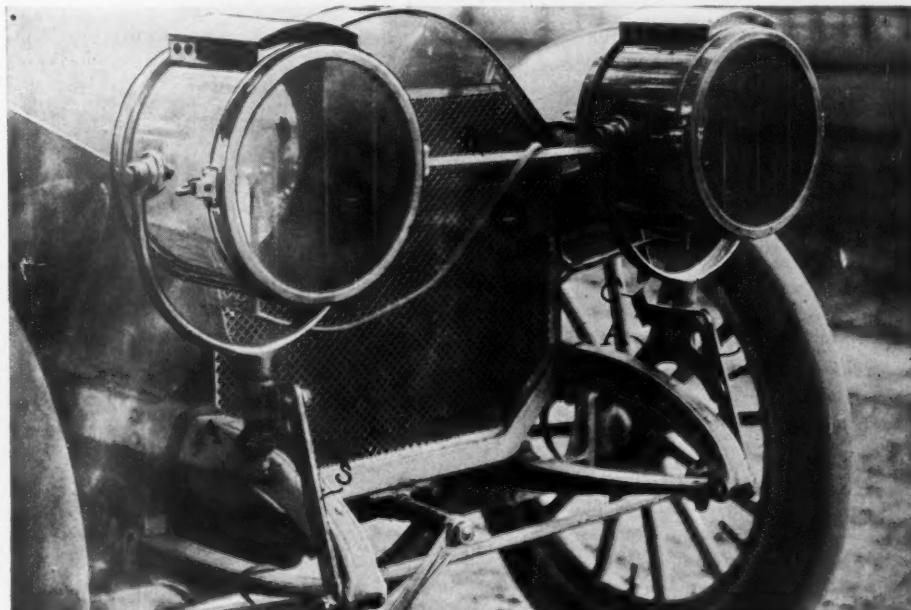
ILLUSTRATING ATTACHING OF LARGE HEADLIGHTS
